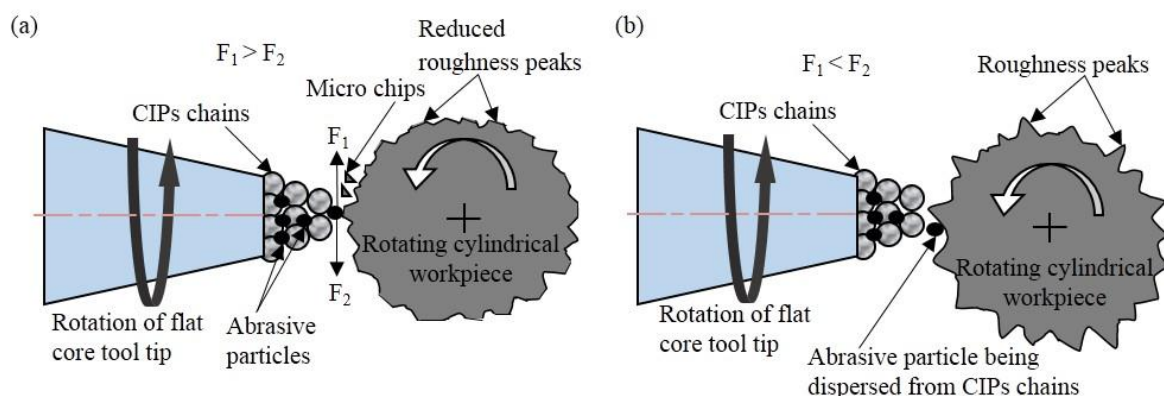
Mechanism of material removal (a) at low workpiece rotational speed ($F_1 > F_2$), and (b) at high workpiece rotational speed ($F_1 < F_2$)
